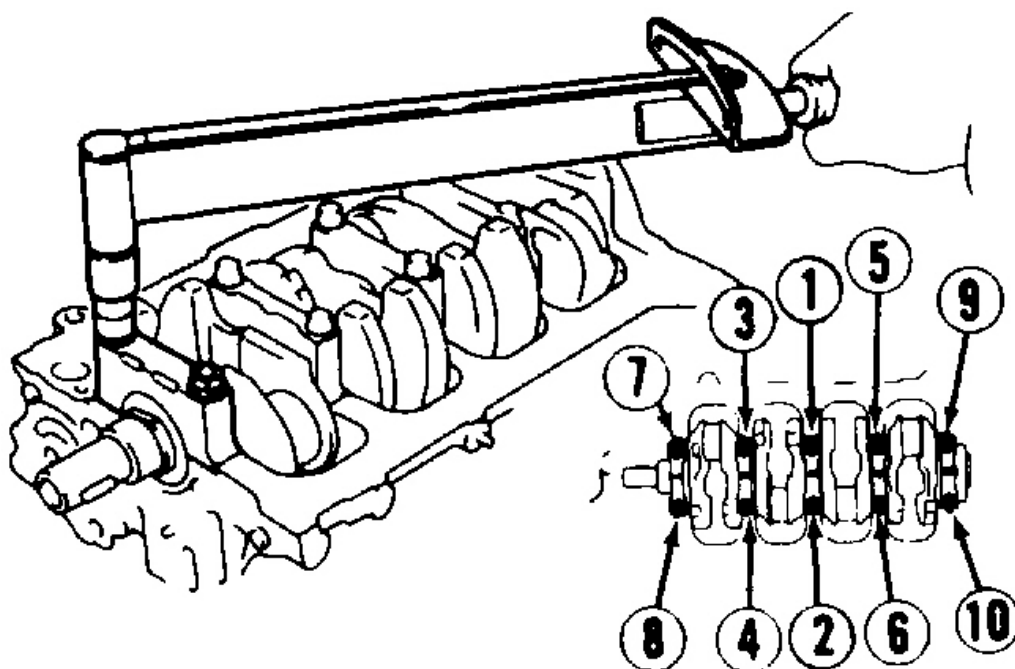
Crankshaft Main Bearing Tightening Sequence
